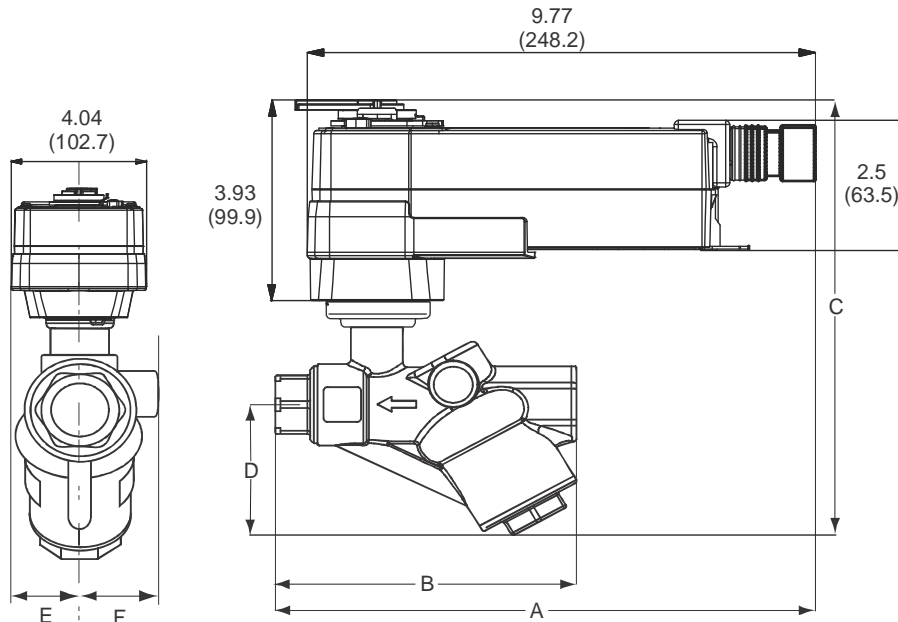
VA2120 Actuated P1000 Pressure Independent Valve without Pressure Taps Dimensions, in. (mm)
